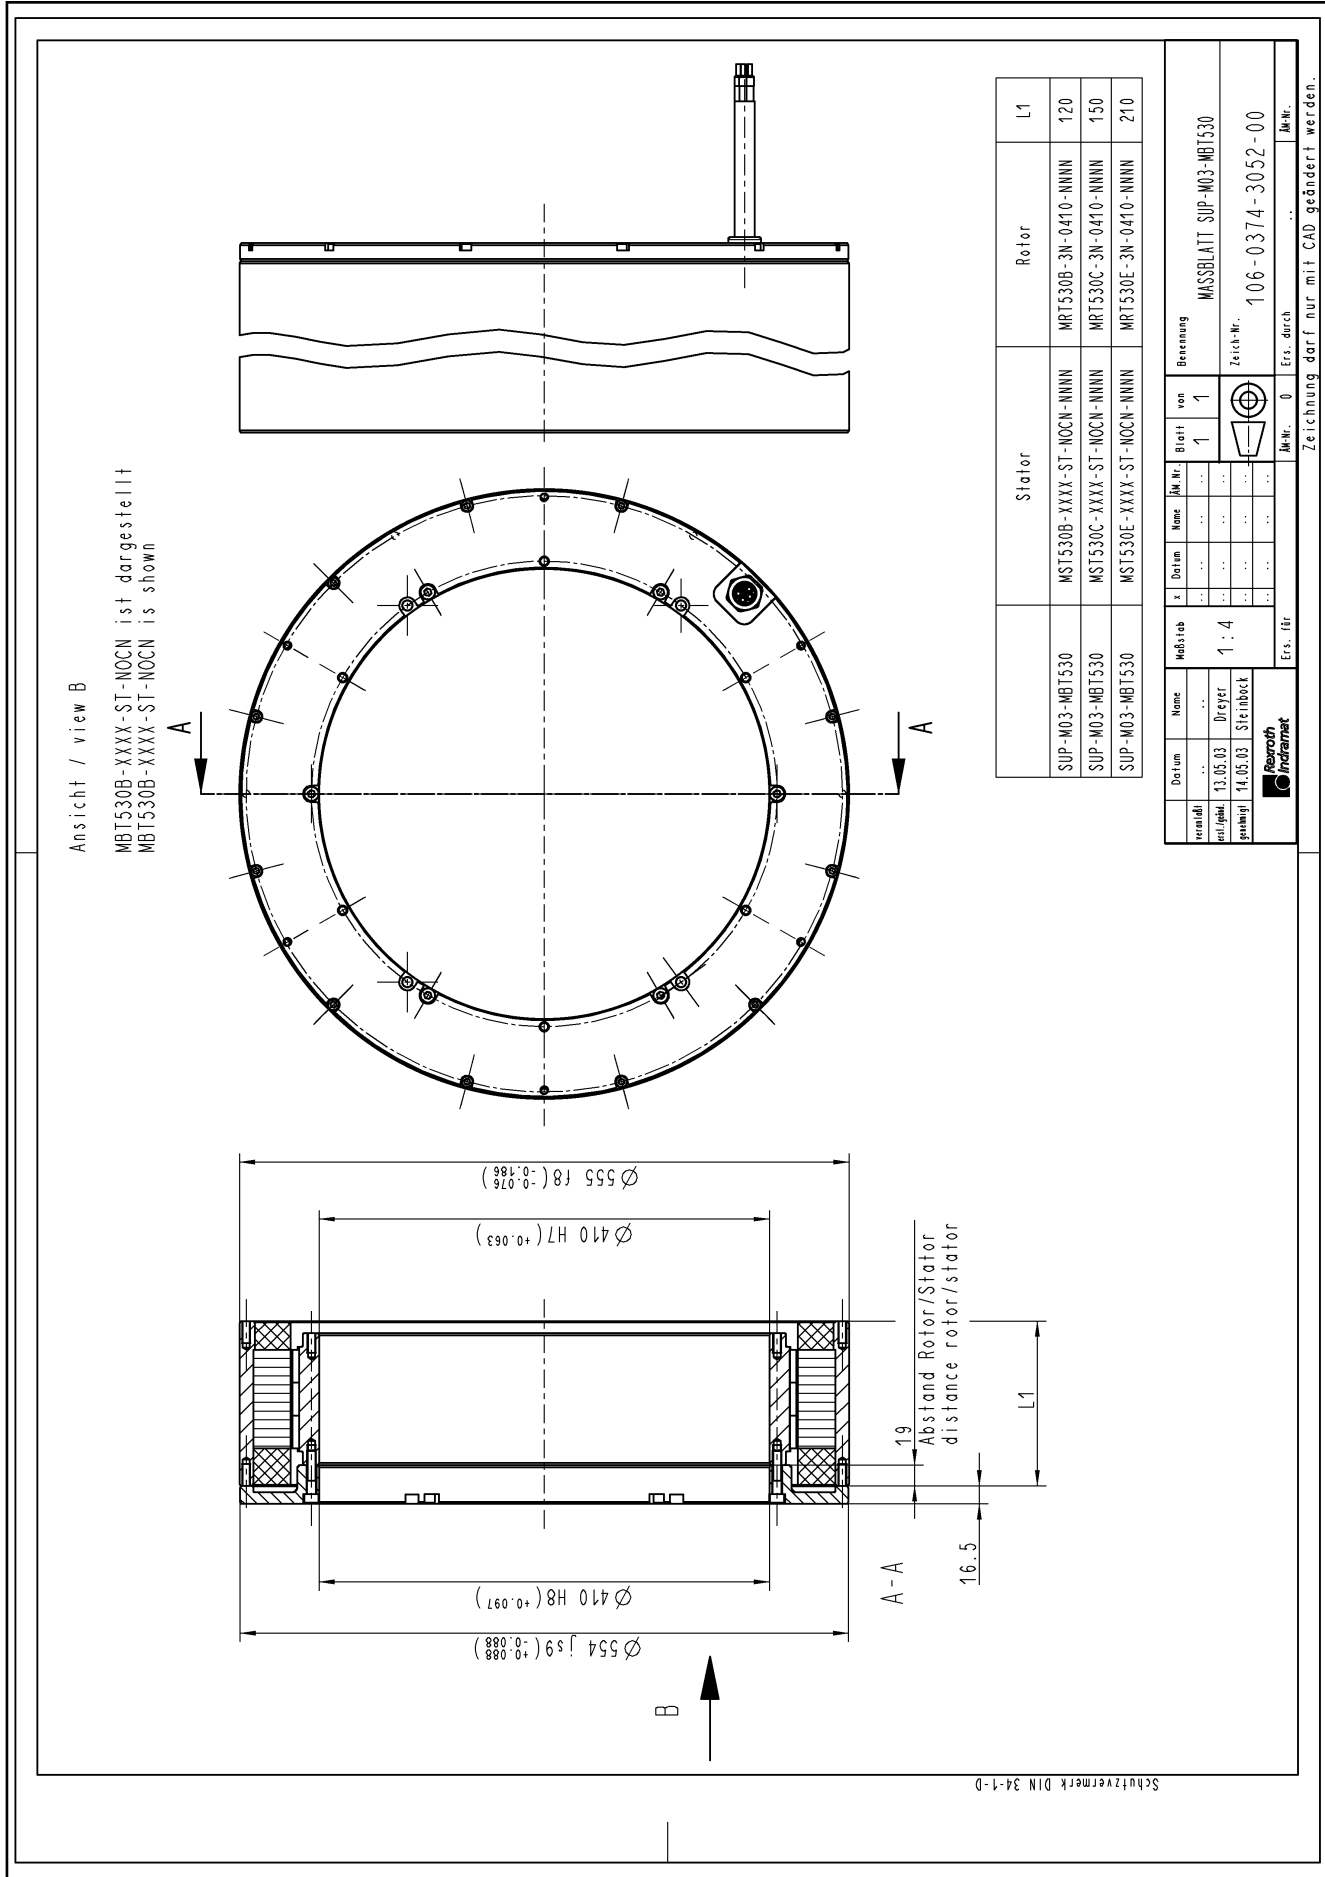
Dimension sheet for mounting ring in SUP-M03-MBT530
